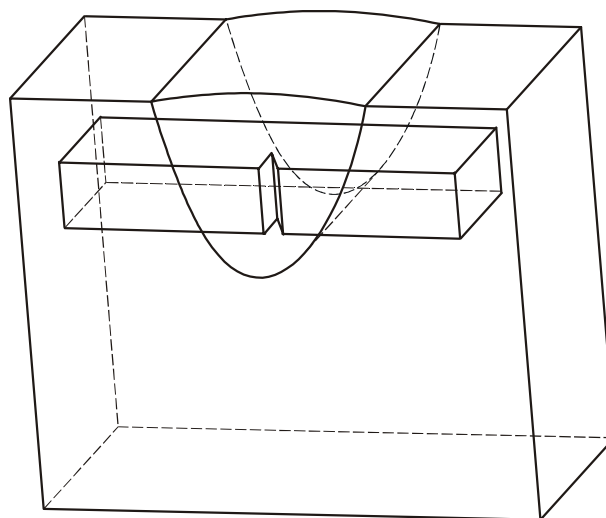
Cutting the sample for simulation from the V-shaped single-pass welded joint and the position of mechanical notch of Charpy specimen
